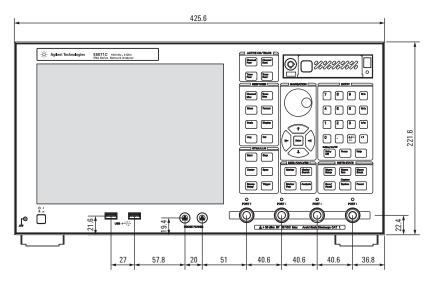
Dimensions (front view, E5071C with option 430/435/480/485, in millimeters)
